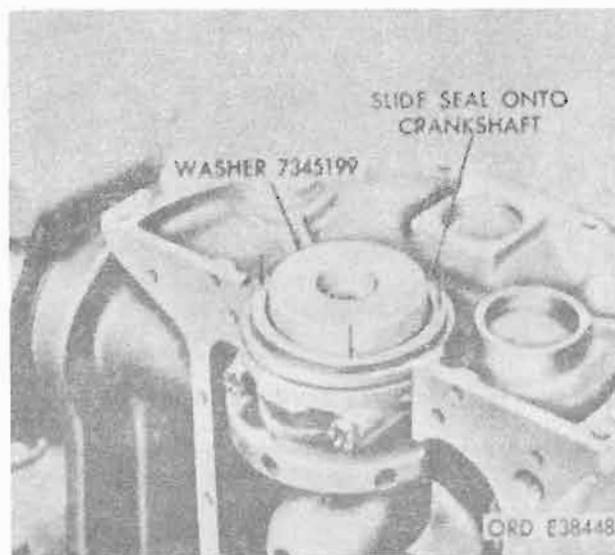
Sliding crankshaft rear seal drum over crankshaft.
